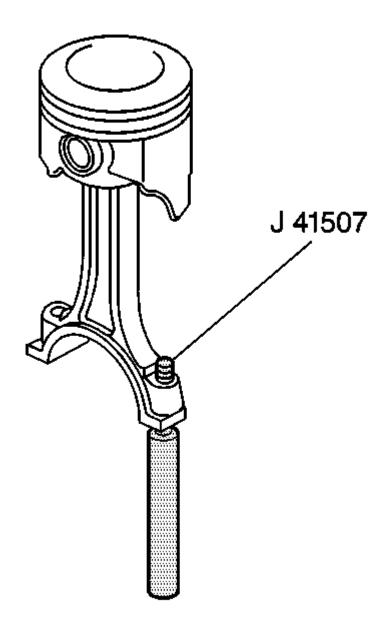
Installing J 41507 To Connecting Rod Courtesy of GENERAL MOTORS CORP.
